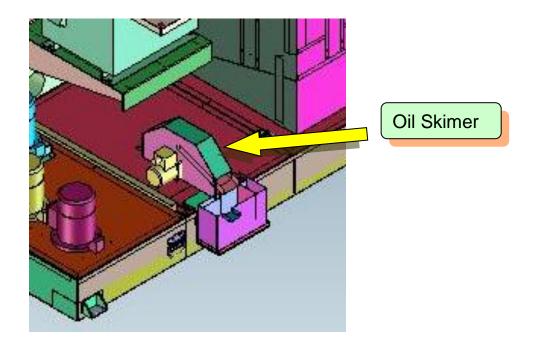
OIL SKIMER & OIL LEVEL INDICAOR
